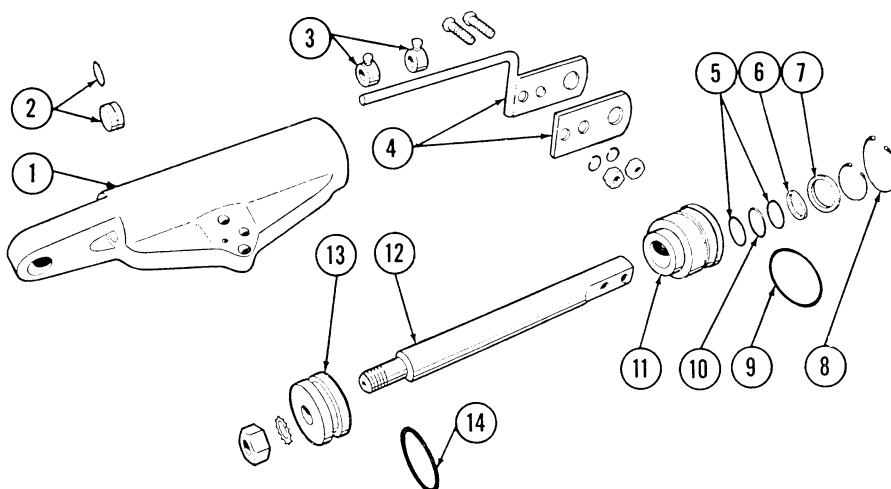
Exploded view of Pony hydraulic lift work cylinder.
